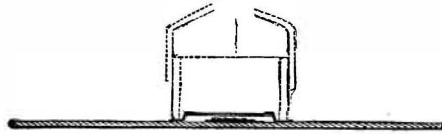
SECTIONAL VIEW OF THE SLIDE AND HEATING TOOL.
